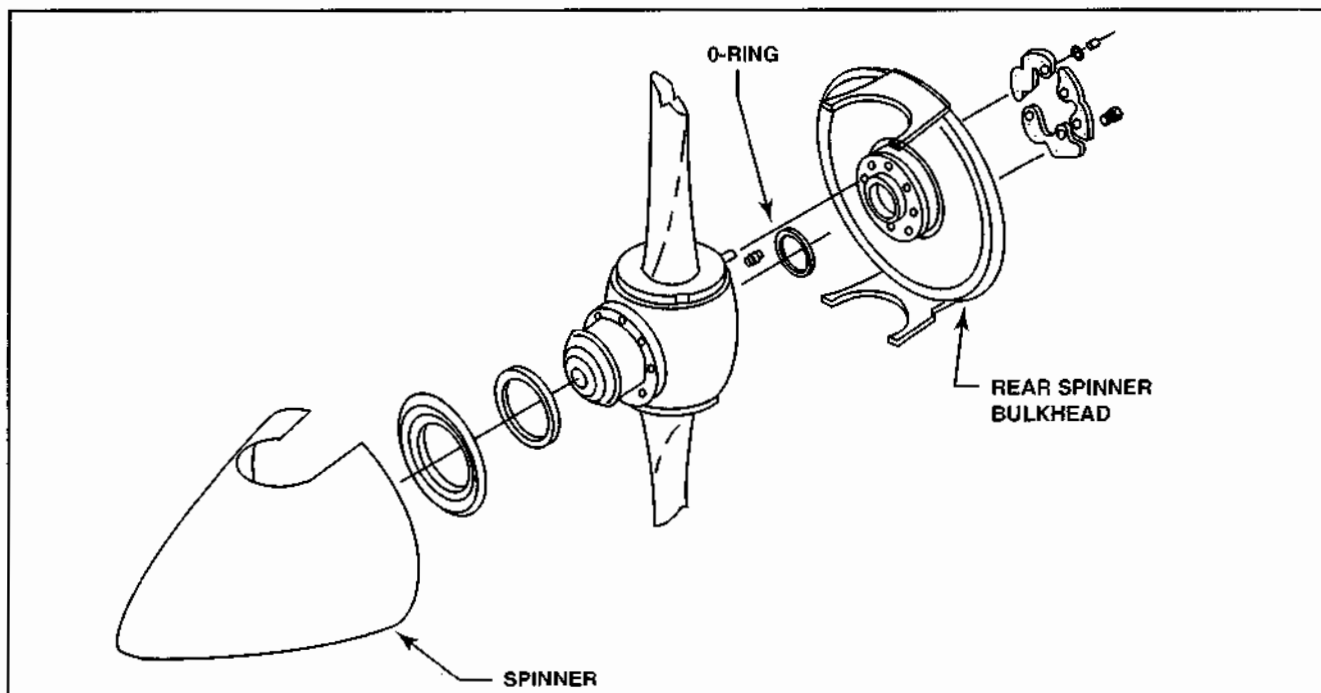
McCauley constant-speed propellers are installed on flanged crankshafts with an O-ring seal to prevent oil leakage.
